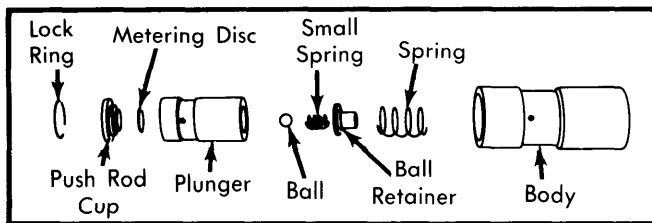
Exploded View of Hydraulic Lifter Assembly
